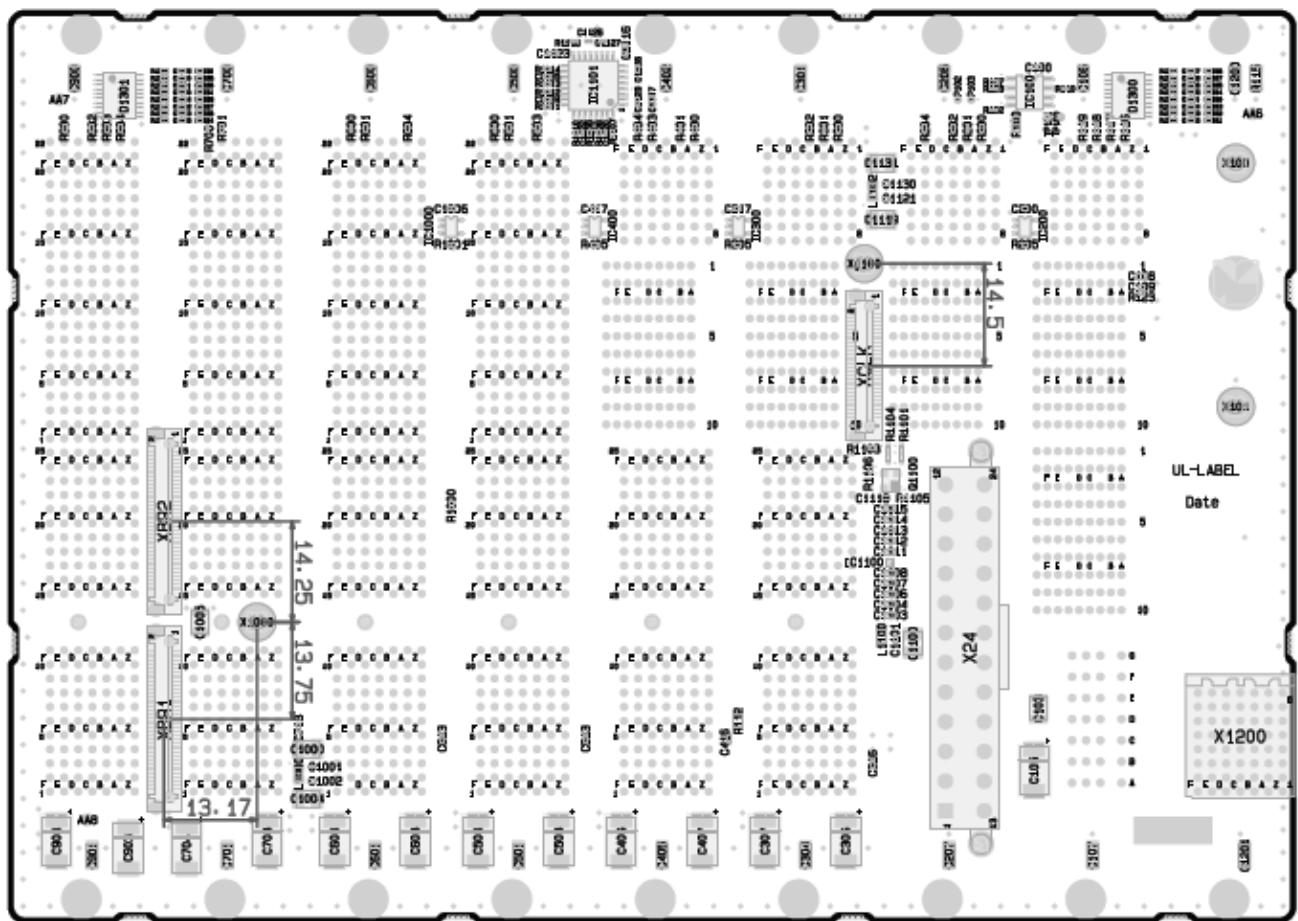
PXIe 3U 8slot series backplane dimensions rear side (dimensions in millimeter).
